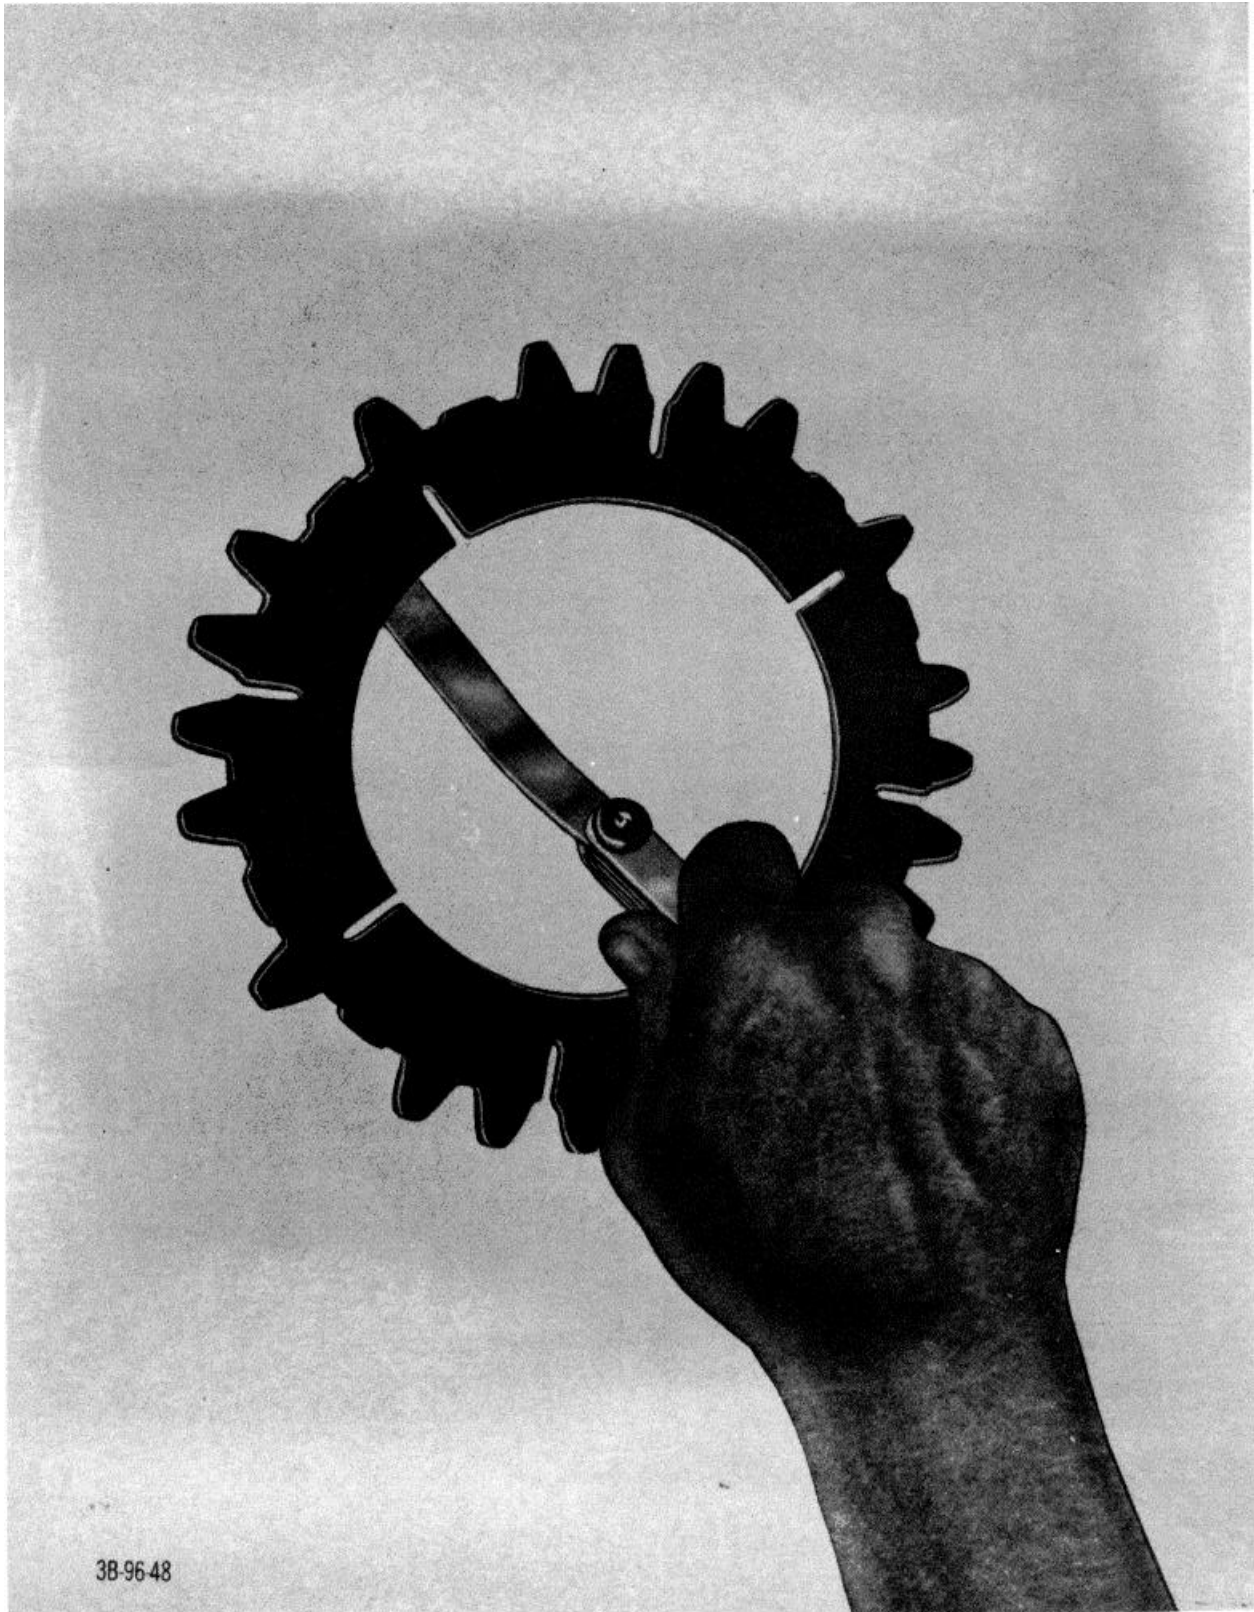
Checking for "dishing" of separator plates of high-and-low clutch assembly.
